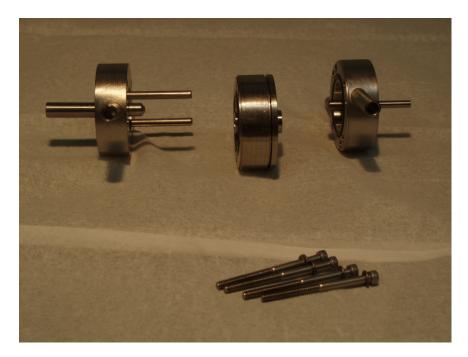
Photo of the disassembled PCVI showing the base with guide pins on the left, the center body piece with nozzle guide plate in the middle, and the entrance nozzle body piece on the right hand side. Also shown are the four bolts used to hold the body pieces together and compress the O-rings between each body piece.
